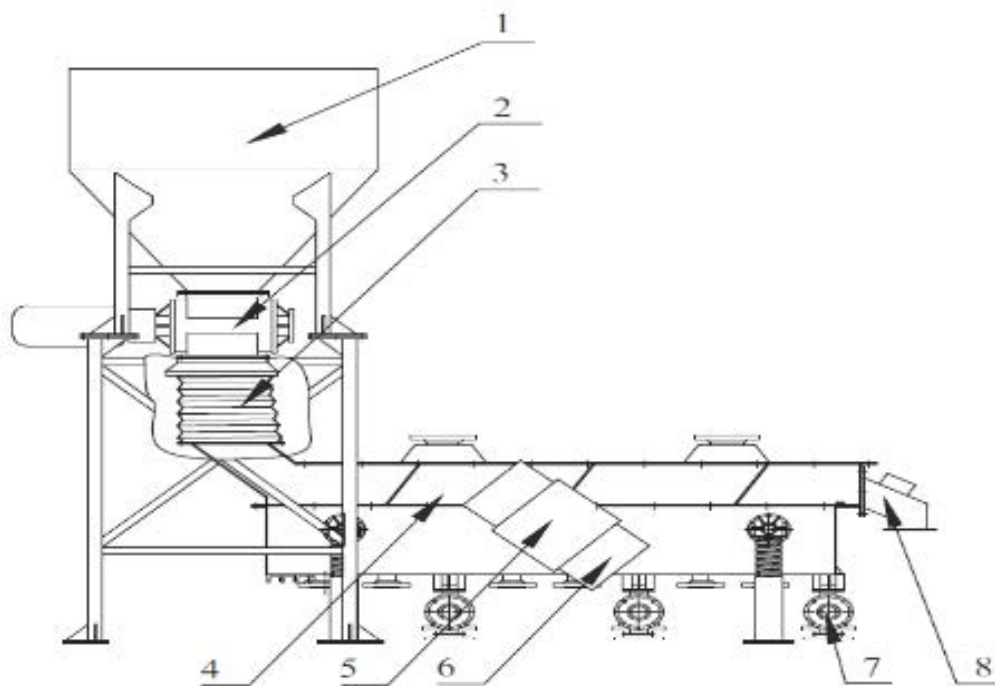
Mechanical structure of the continuous vibrated gas-fluidized bed separator. 1 Feed silo; 2 impeller feeder; 3 flexible coupling materials; 4 separating bed; 5 vibration motor; 6 air chamber; 7 impeller discharging device; 8 overflow discharge opening of clean coal [4].
